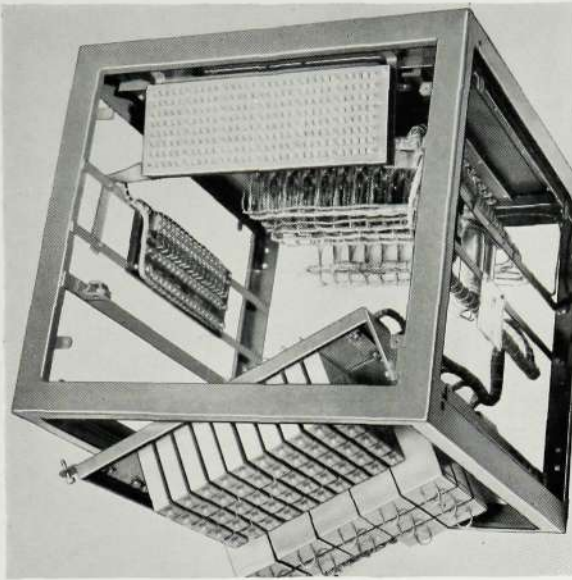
Plan view of upper section of switchboard showing easy access to terminal block
